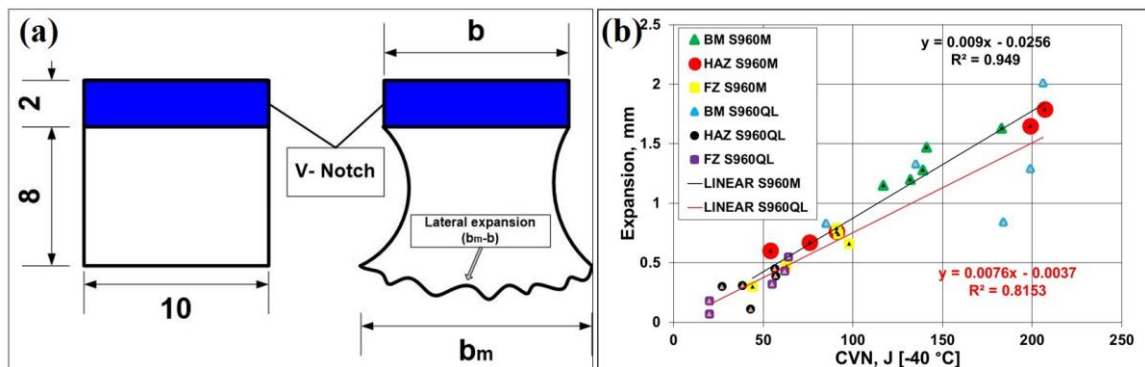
(a) Lateral expansion on CVN test specimen (All dimensions in mm) [201]; (b) Expansion graph S960QL & S960M.
